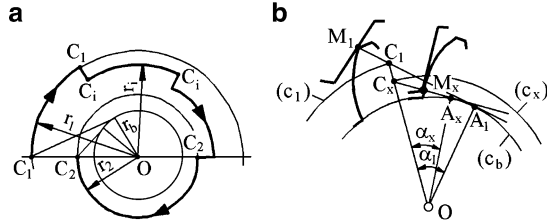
The gearing scheme between the translated wheel and the eccentric sector
